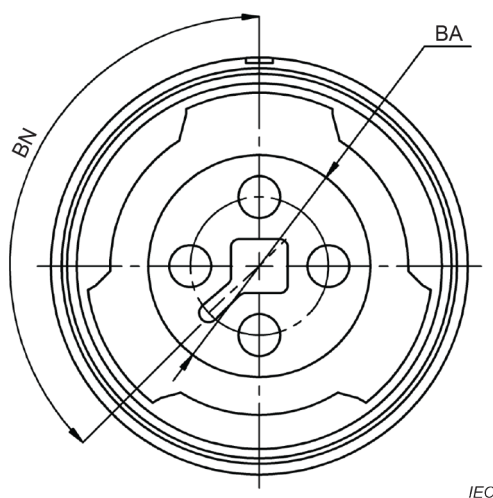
Front view of the female side of the push-pull housing for T-coding
